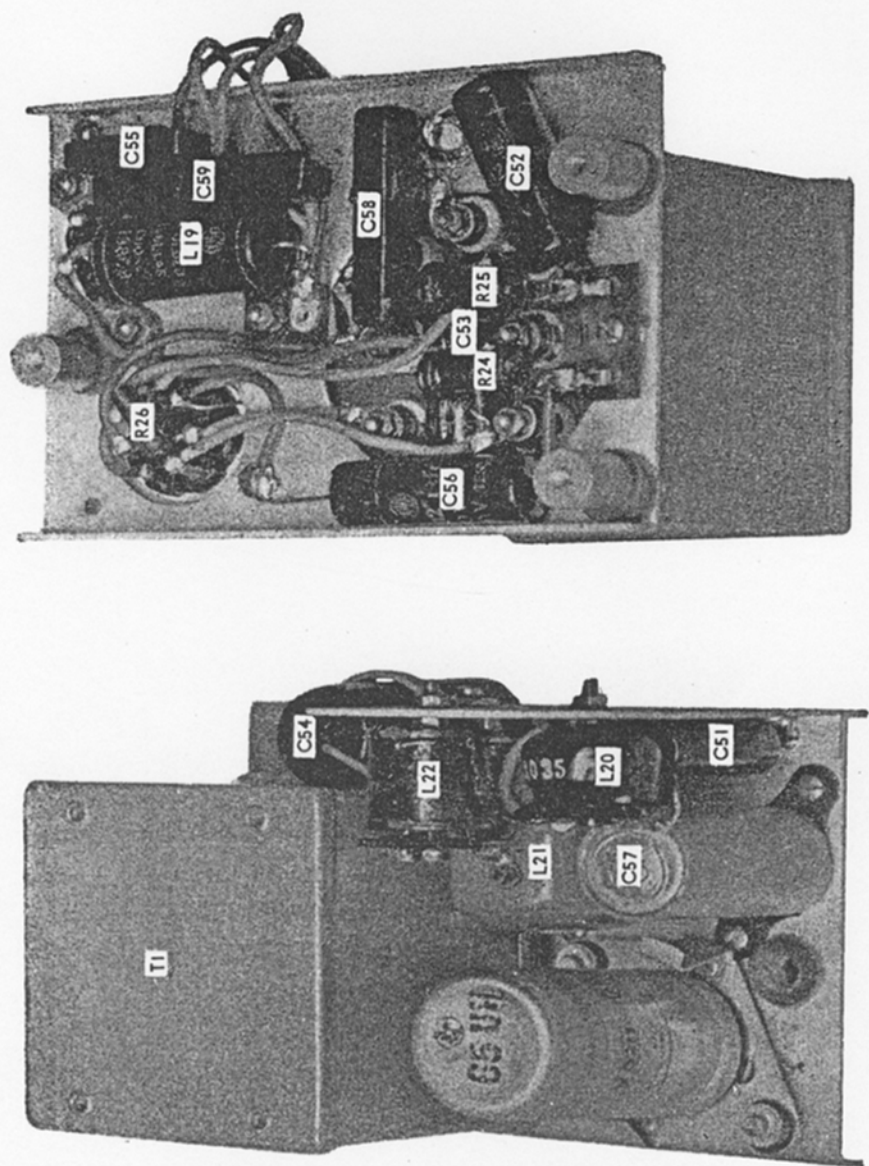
VIBRATOR POWER SUPPLY UNIT TYPE 6H6499.
